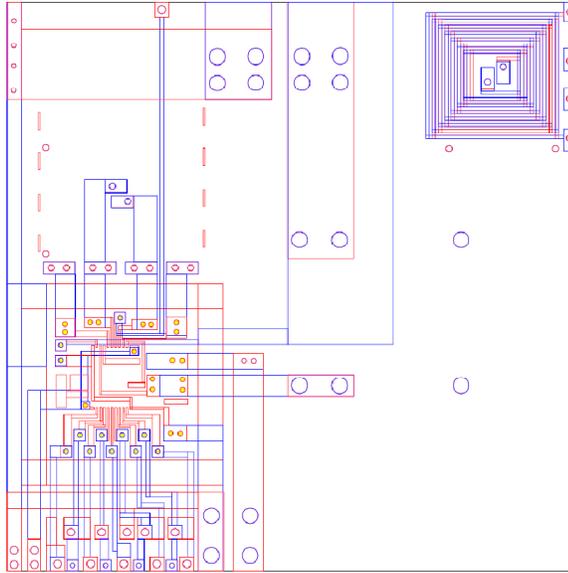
AutoCAD layout of the two layer AlN planar board.
